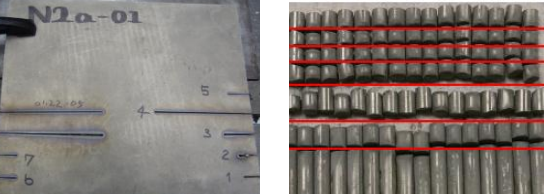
Example of cutting test results (Left) Laser cutting (NCF600), (Right) NitroJet® cutting (Zr)
